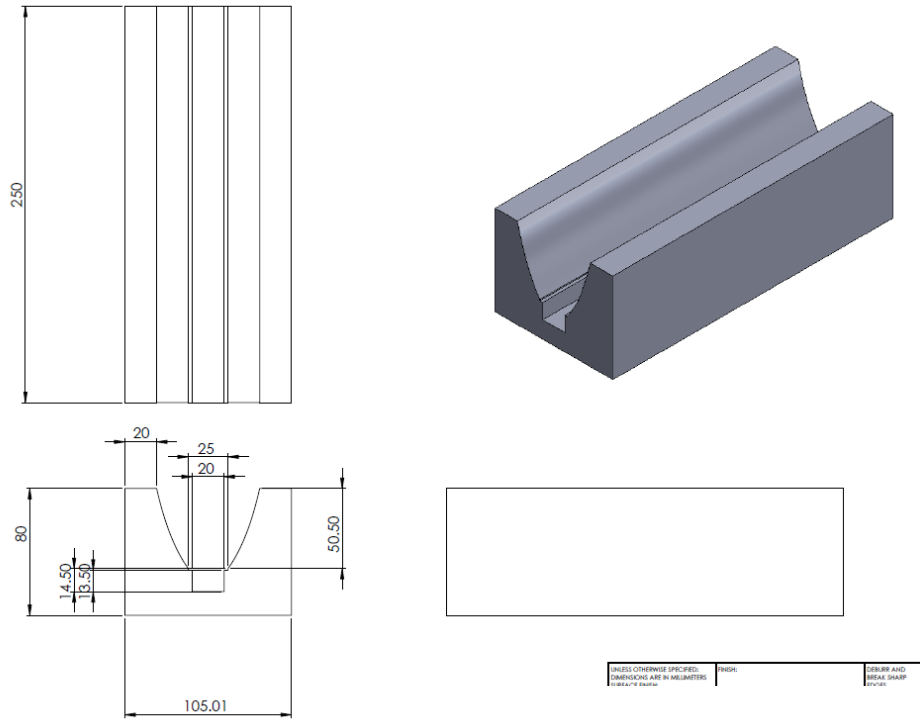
CPC Technical Drawing Schematic (dimensions in mm)
